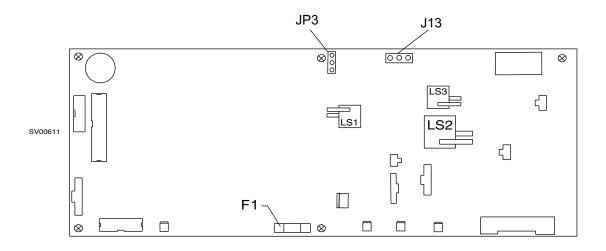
Boot Strap Jumper and Download Connections on Control PCB P/N 4118079
